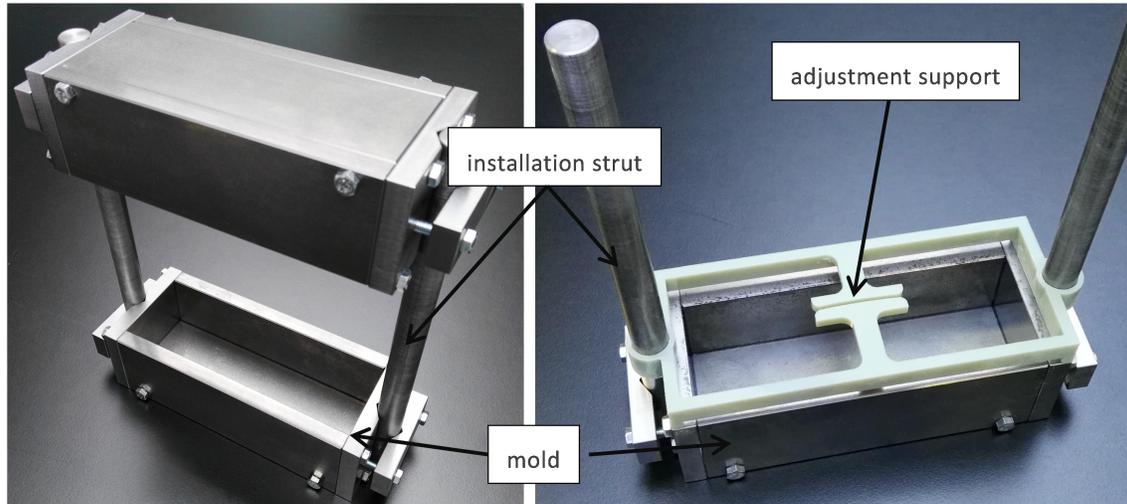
Specimen device; Installation struts and adjustment support are removed after moulding of the specimen
